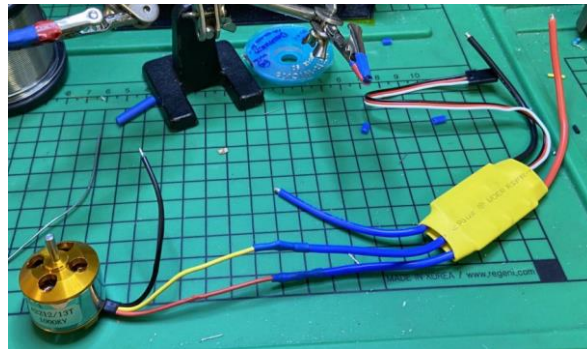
wire welding procedure of BLDC motor Goolsky A2212 1000KV and HP 30A ESC.
